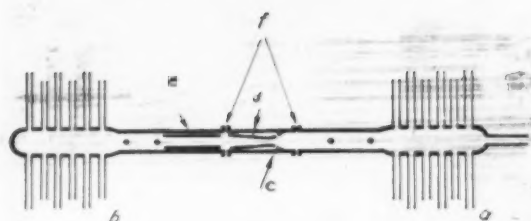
Injection Desuperheater I. (a) Steam entering (b) Steam leaving (c) Water injection (d) Nozzle (e) Liner (f) Clamped connection.
